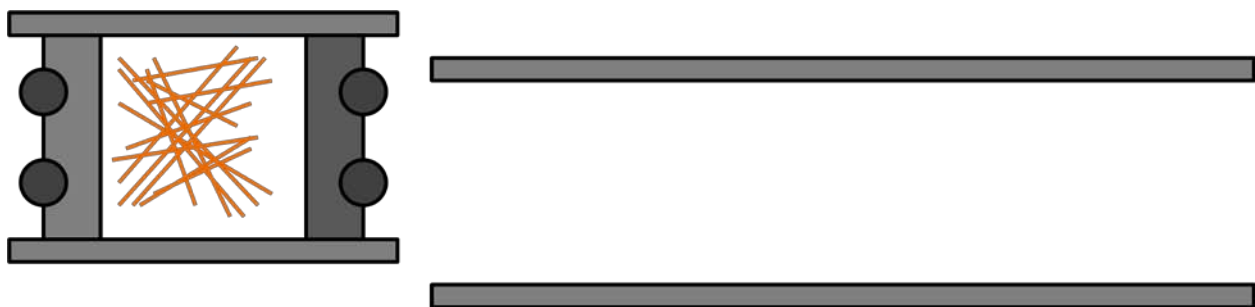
The completed mold is removed from the press and is ready to be placed in the oven.
